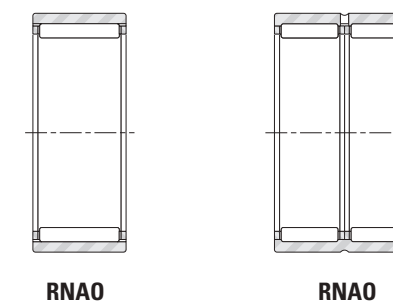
Needle roller bearings without flanges, without inner rings
